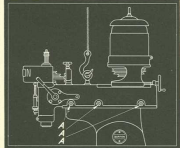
Lifting Machine with Eye-bolt in Sliding Head
